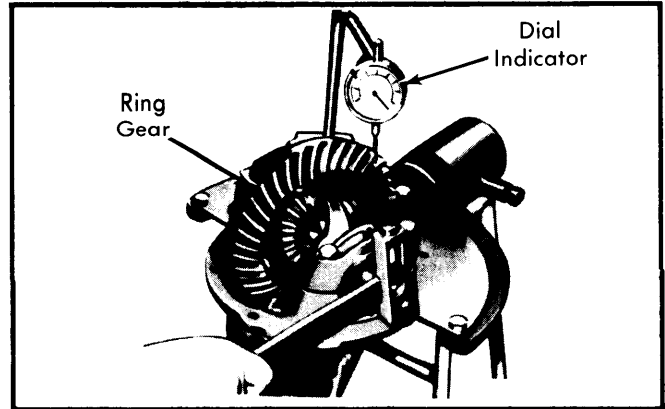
Checking Ring-to-Pinion Gear Backlash
